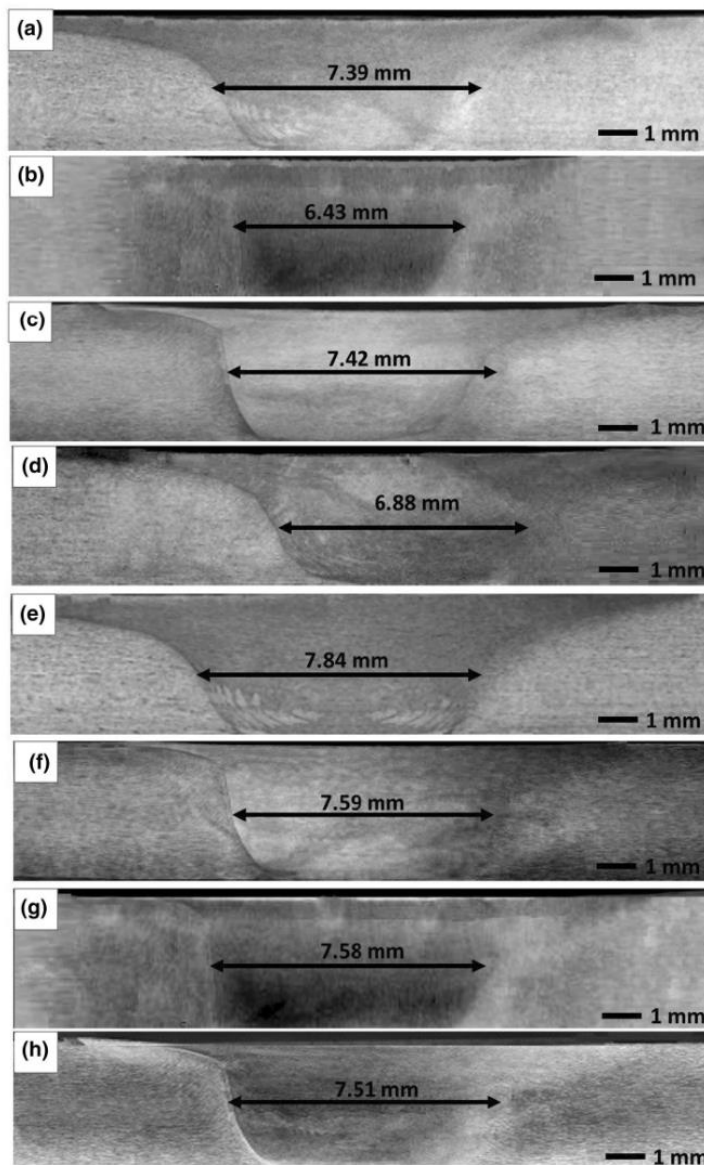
Macrostructure of the produced welds—FSW1 (a), FSW2 (b), FSW3 (c), FSW4 (d), FSW5 (e), FSW6 (f), FSW7 (g) and FSW8 (h).
